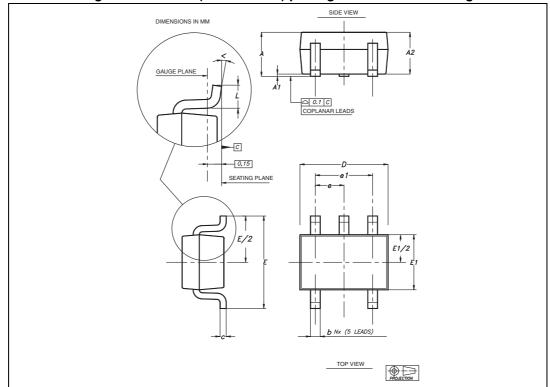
SC70-5 (or SOT323-5) package mechanical drawing
